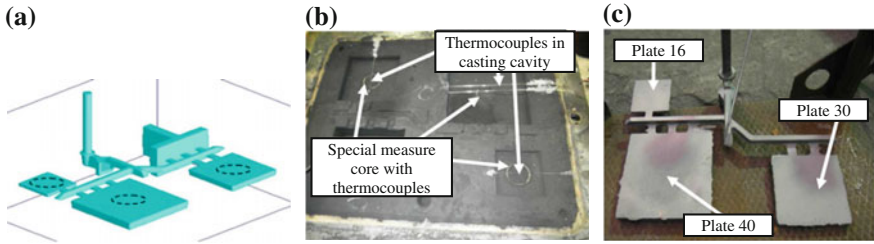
First experiment (Exp. 1). Casting arrangement in the mould (800 mm × 600 mm × 250 mm). a CAD model with measurement core position, b mould instrumentation, c raw casting knocking out and blasted
